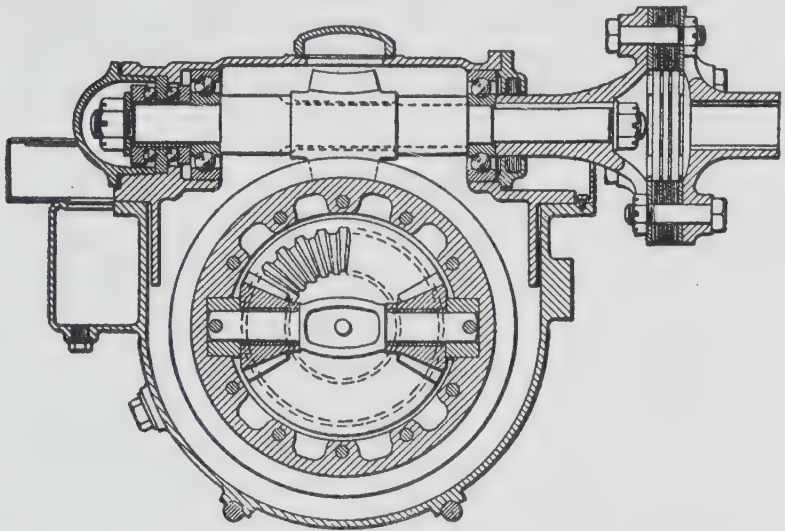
SECTION THROUGH WORM GEAR OF DAIMLER BUS AXLE.
